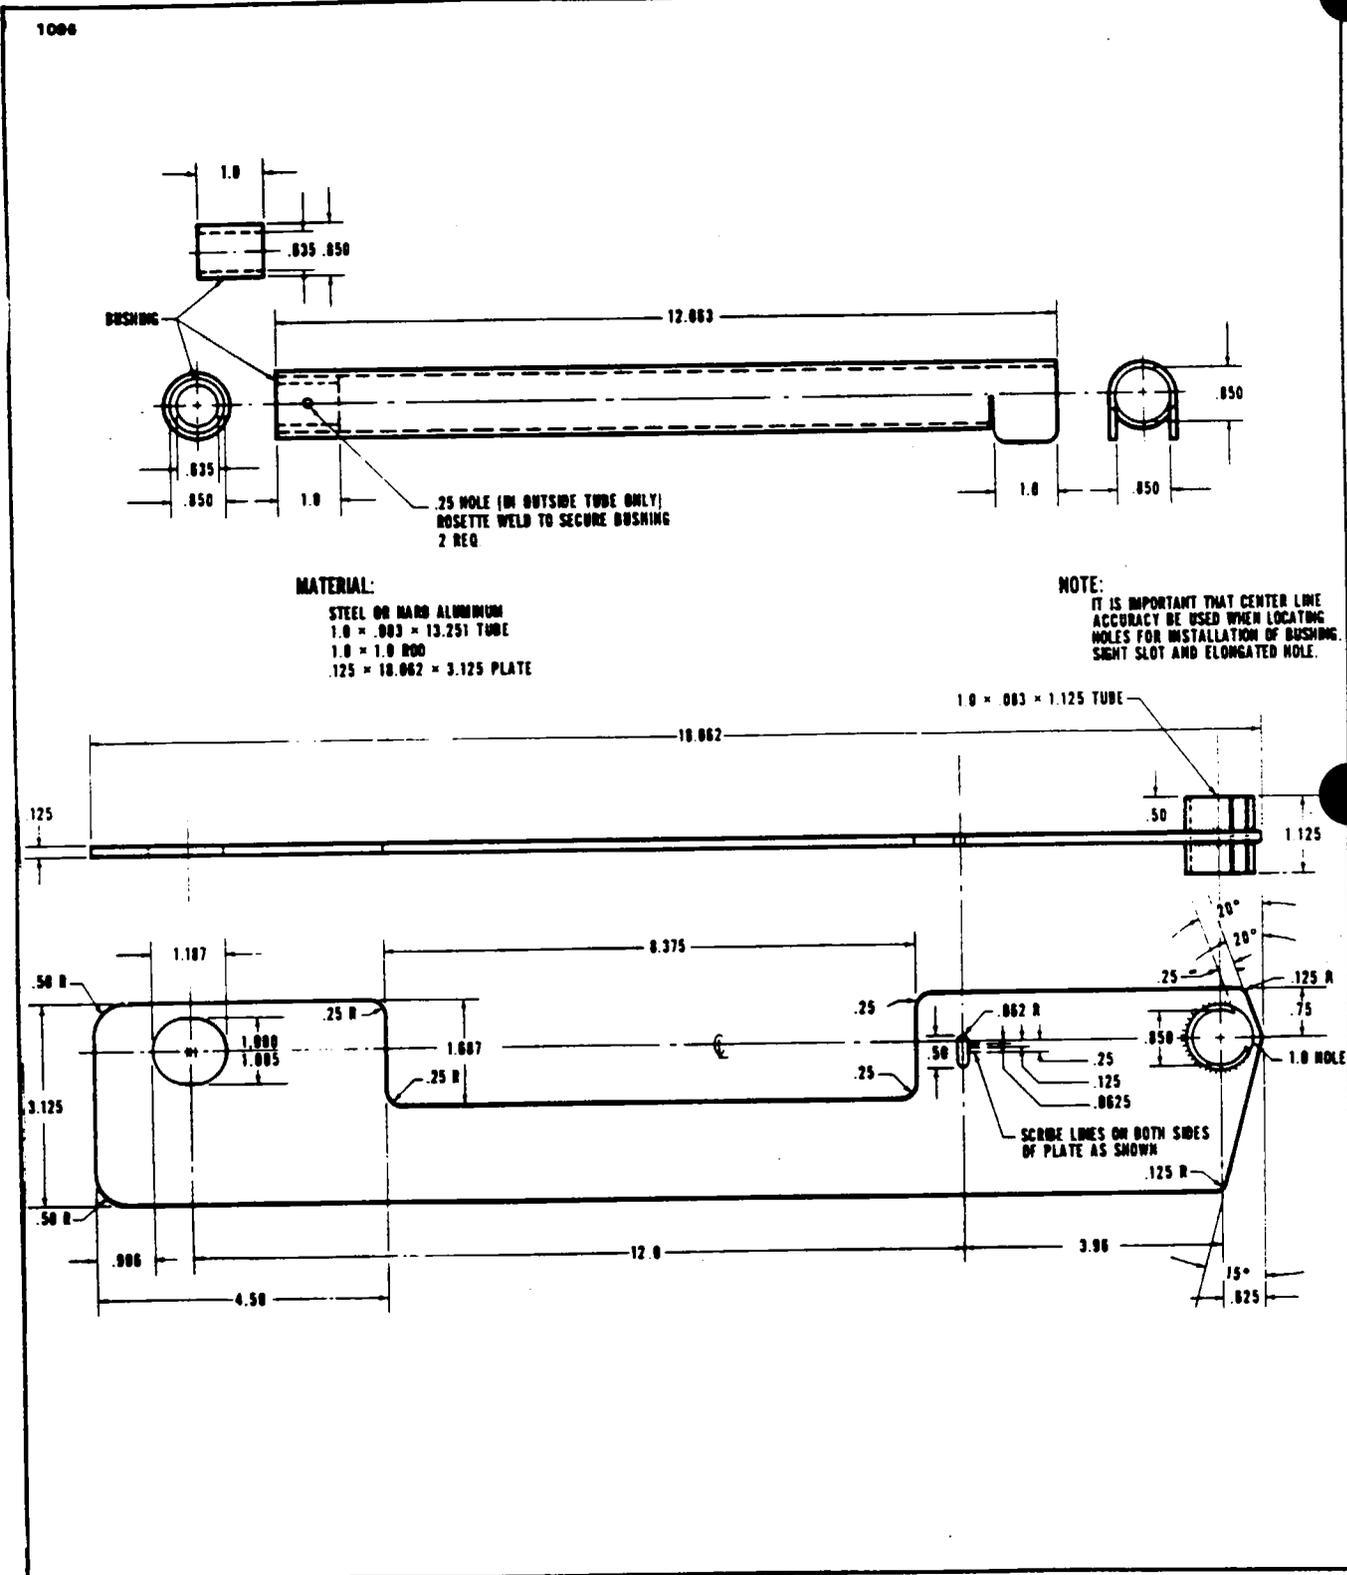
Fabricated Tool, Checking Main Gear Side Brace Link Travel
